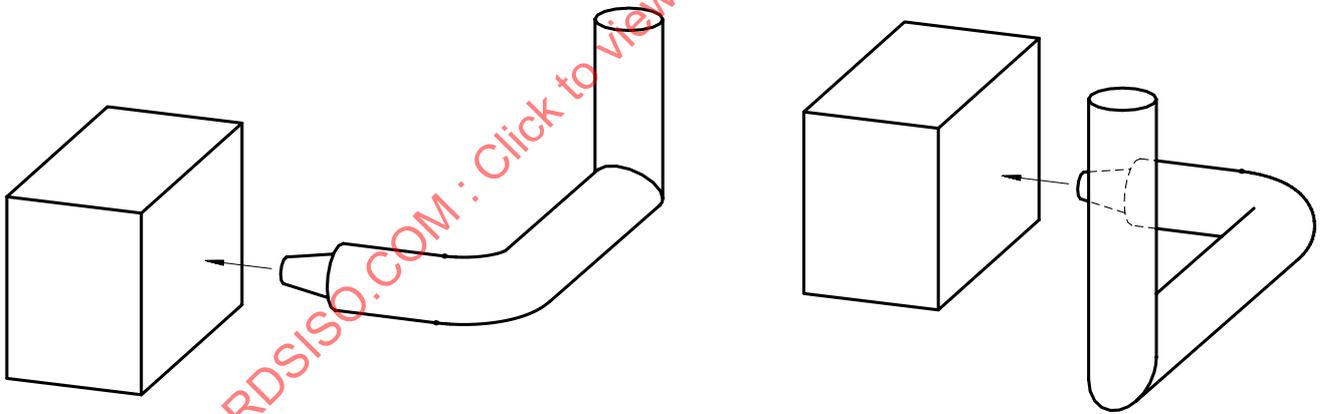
The two positions of the offset wrist for cuts on the vertical faces
